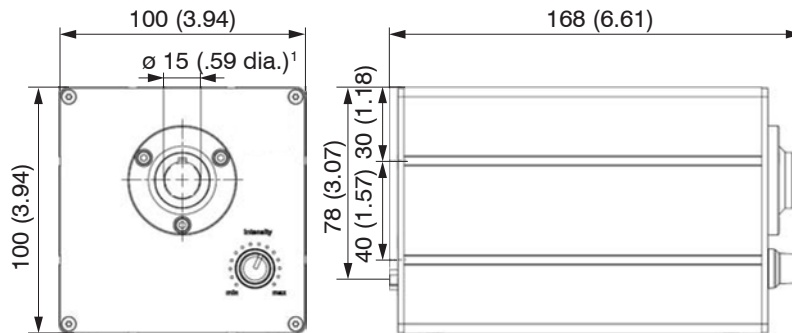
Dimensional drawing ELTROTEC Endlight FOT LED light source
